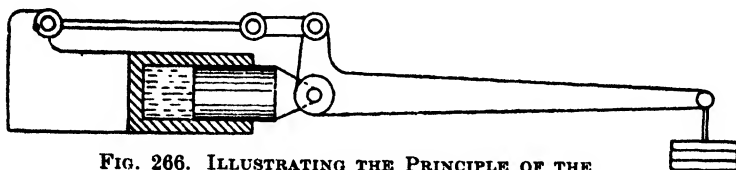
ILLUSTRATING THE PRINCIPLE OF THE WERDER TESTING MACHINE
